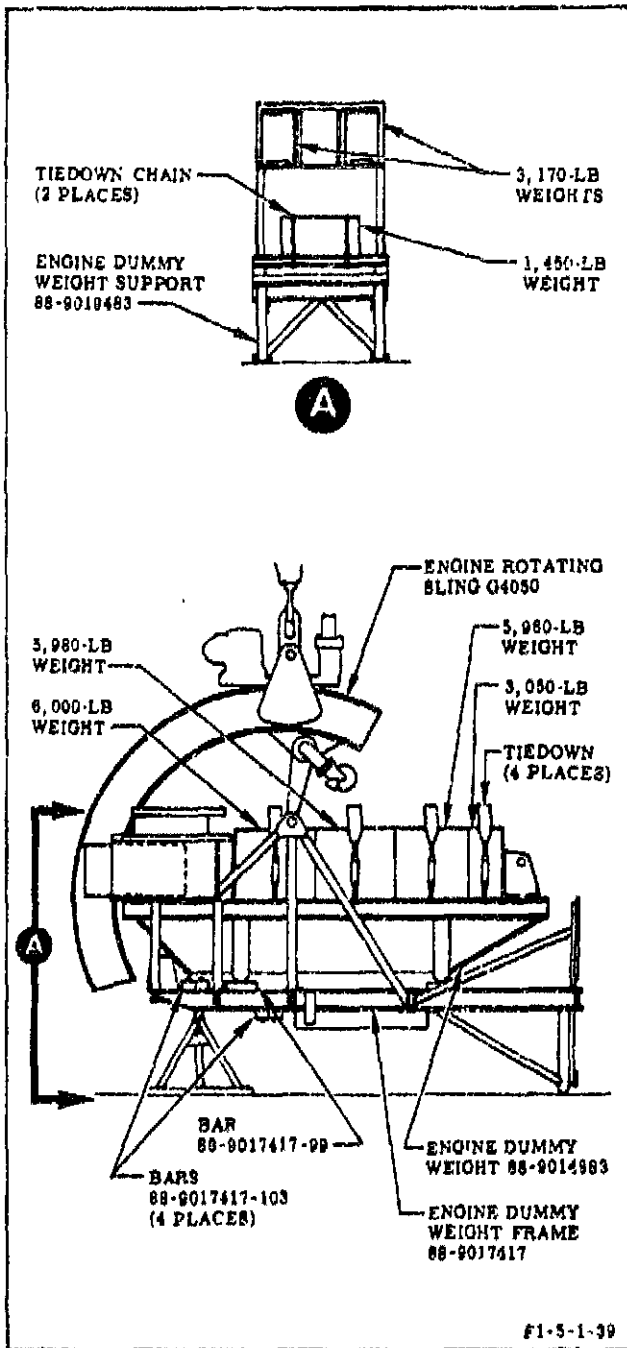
Recommended Proof-Test Setup for Engine Rotating Sling
